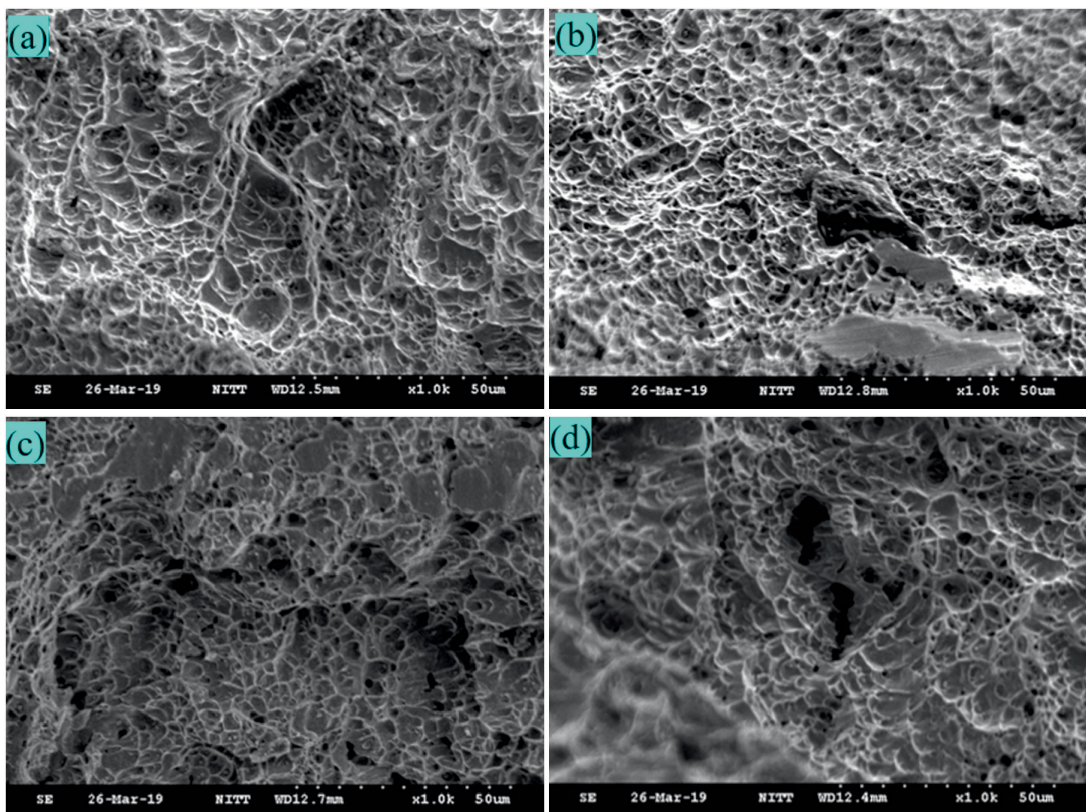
Fractographical analyses by tensile test notched specimen (a) base metal (b) Weld (c) HAZ and (d) TMAZ of welded samples.
